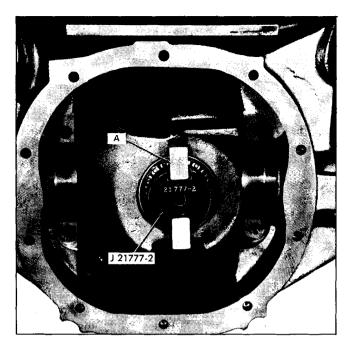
A-33 Pinion Gauge Tools Installed - A and G Series
